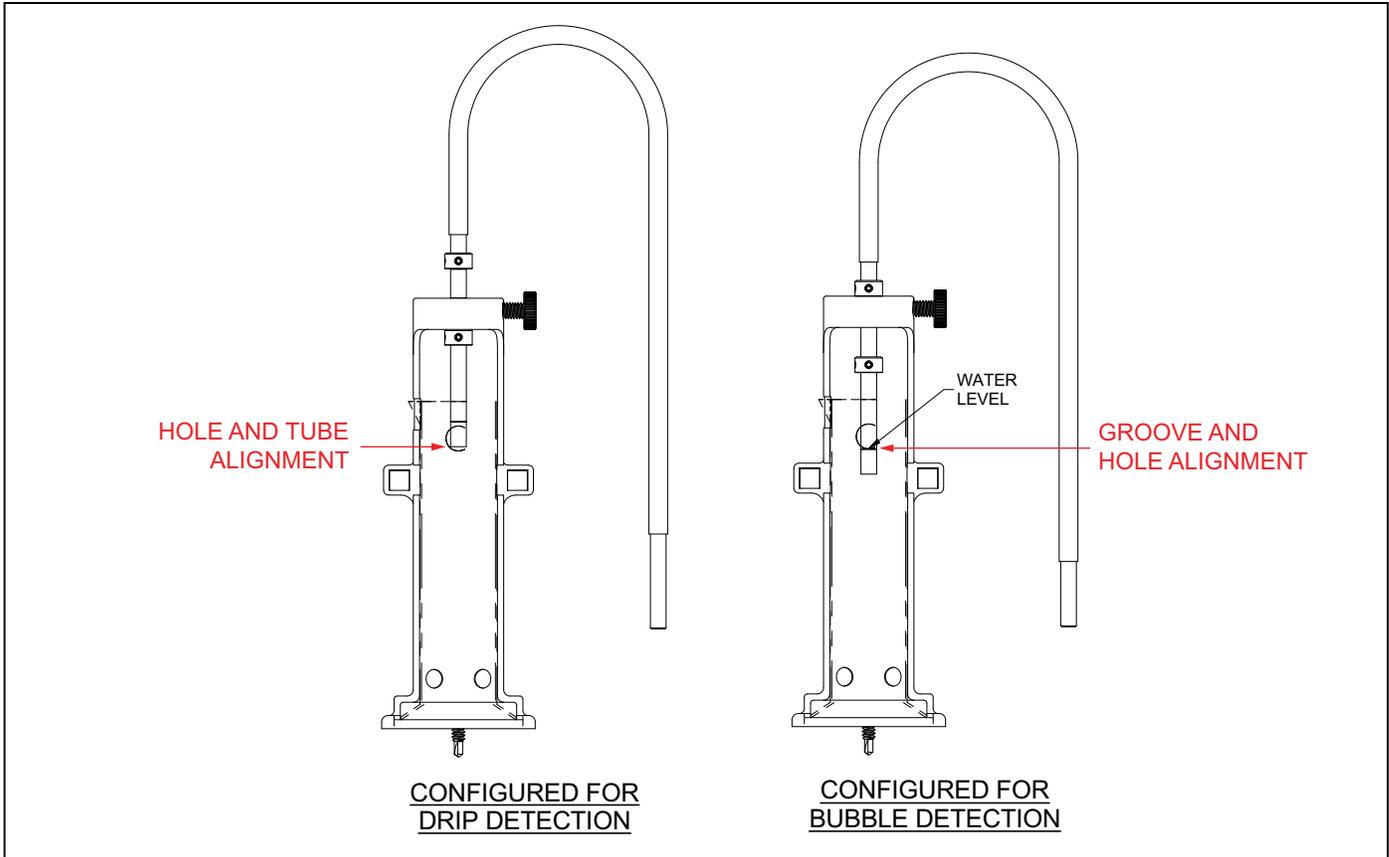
DIGITAL LEAKAGE MEASUREMENT SENSOR
